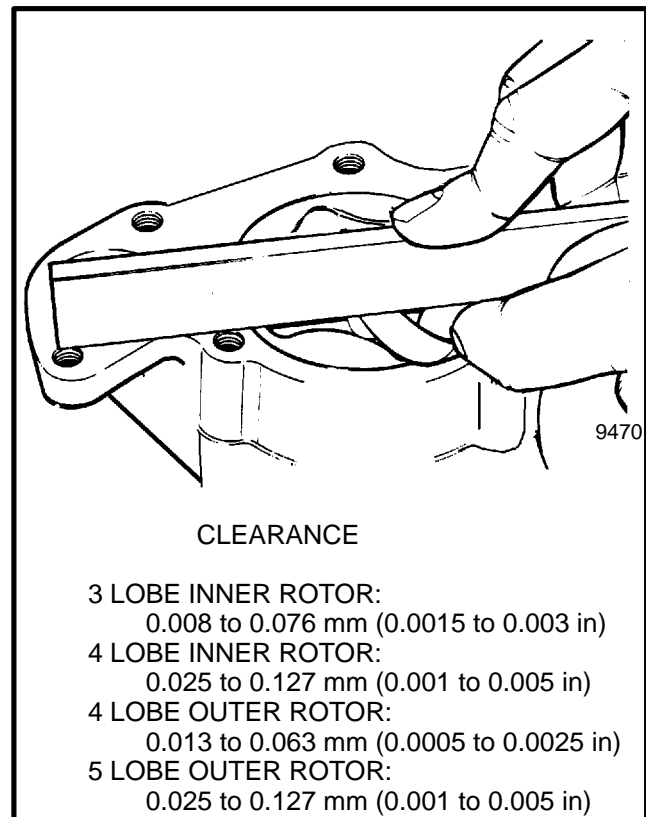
CHECK END CLEARANCE OF THE ROTORS
